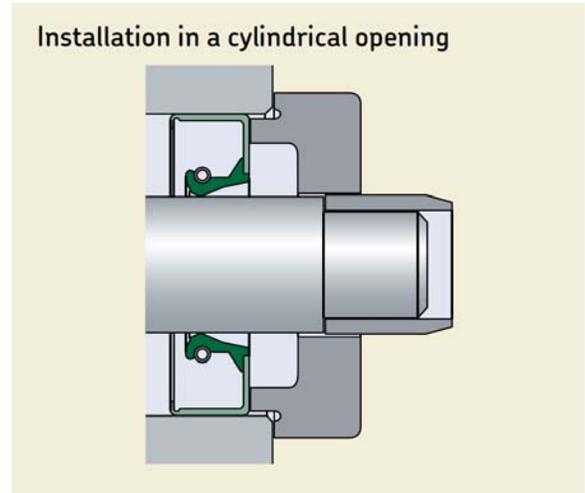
Proper installation of a seal including use of shaft sleeve and fitting tool (Courtesy of SKF, 2011, *Industrial Shaft Seals*, © SKF Group)
